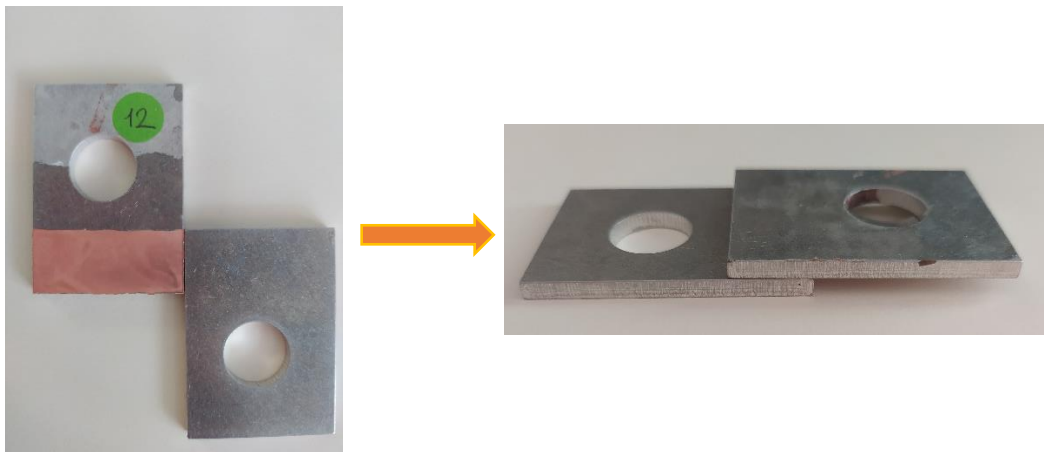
Aluminum pieces subjected to brazing and a typical lap joint formed after brazing
